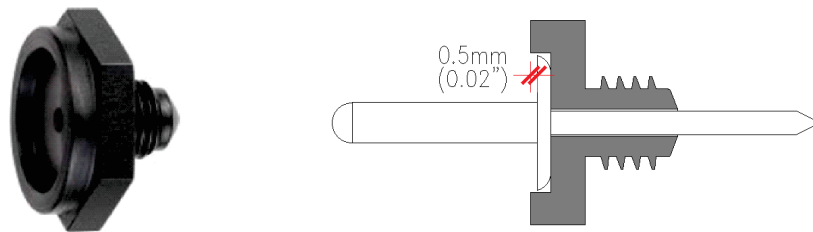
Clamping nozzle, screwed into the riveting tool mouth
